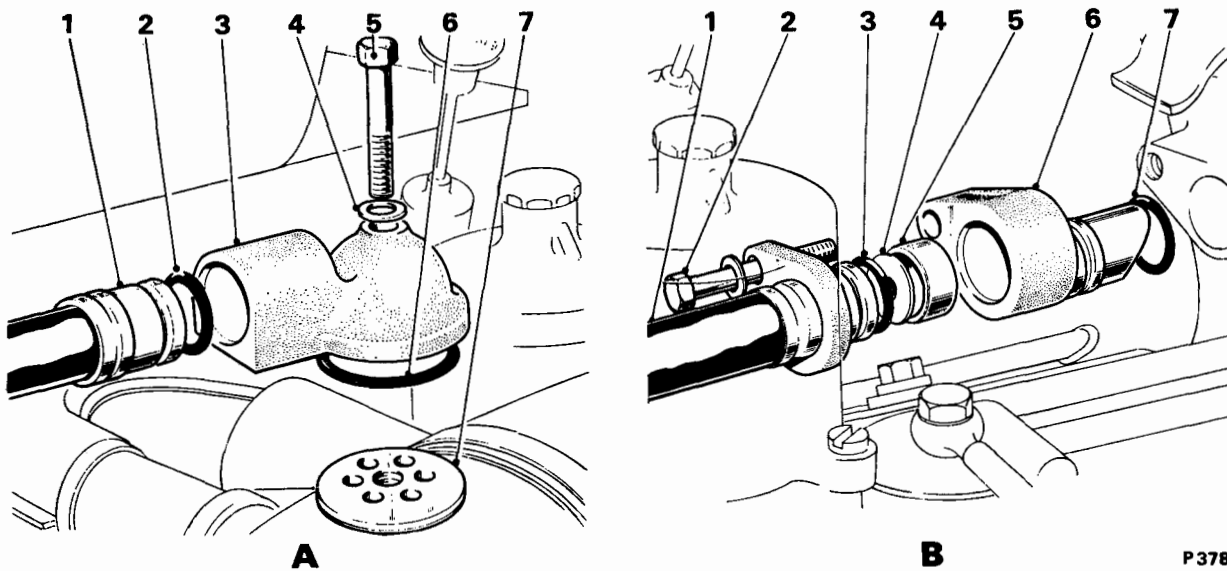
EXPLODED VIEW OF CRANKCASE EMISSION CONTROL PIPE
